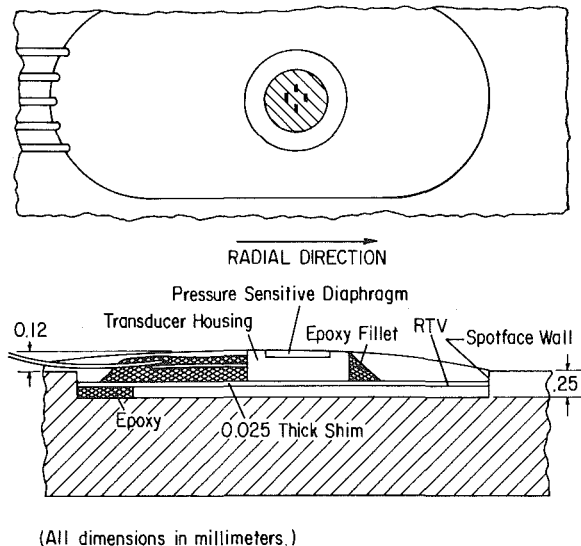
Transducer mounting configuration for unsteady blade pressures [147, 148]
